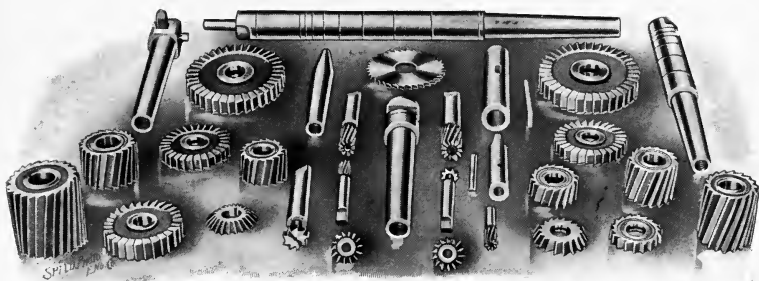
Milling-Machine Cutters, Arbors and Collets.
